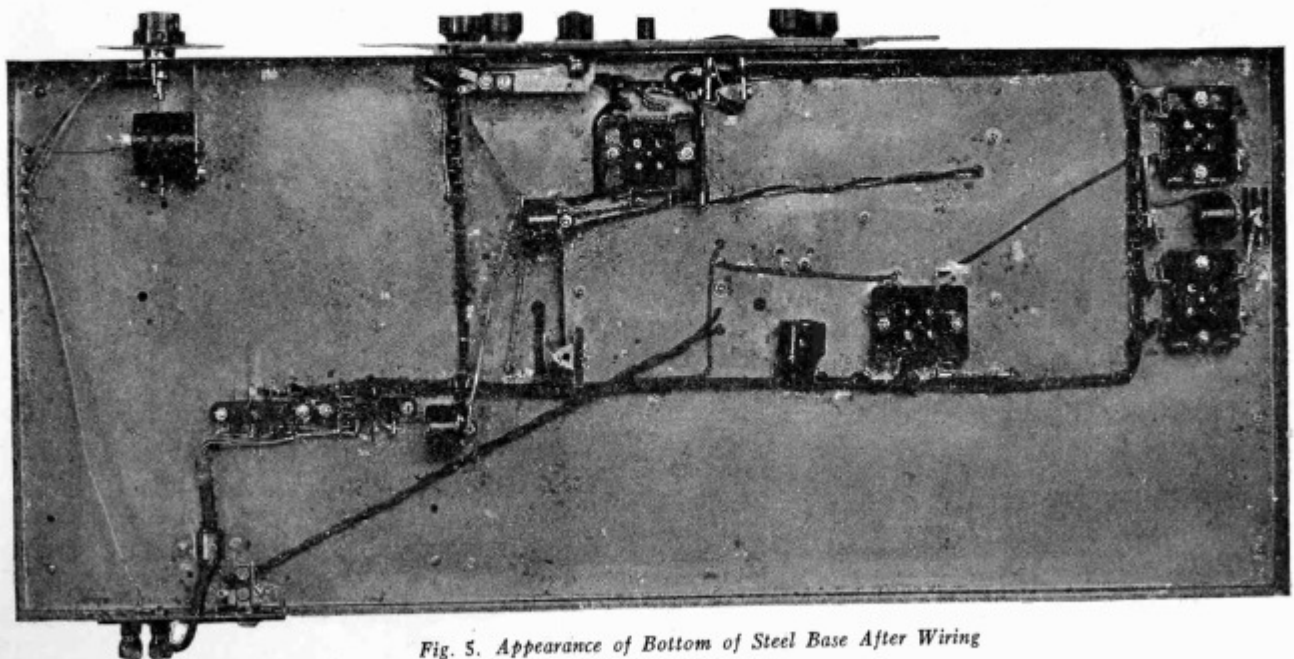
Appearance of Bottom of Steel Base After Wiring
